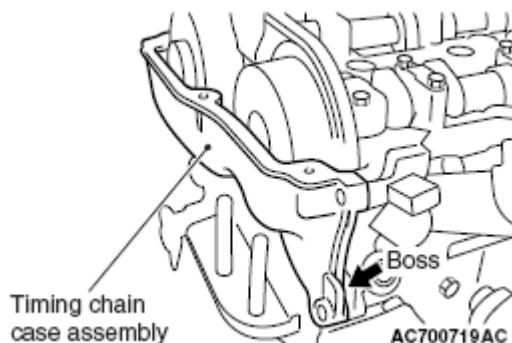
Identifying Timing Chain Case Assembly And Boss
